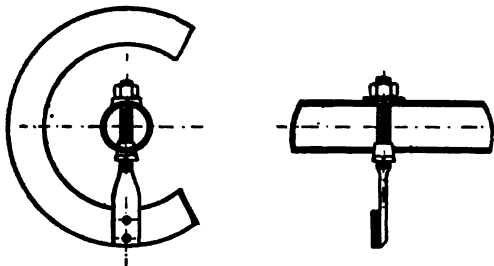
Method of Fixing Spiral of Conveyor to Spindle.
